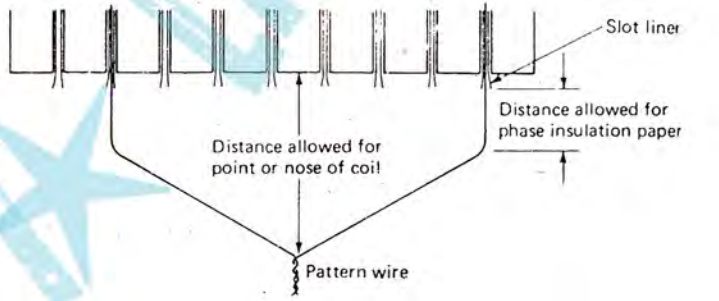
Shaping a pattern wire used to set diamond-shaped winding head.
